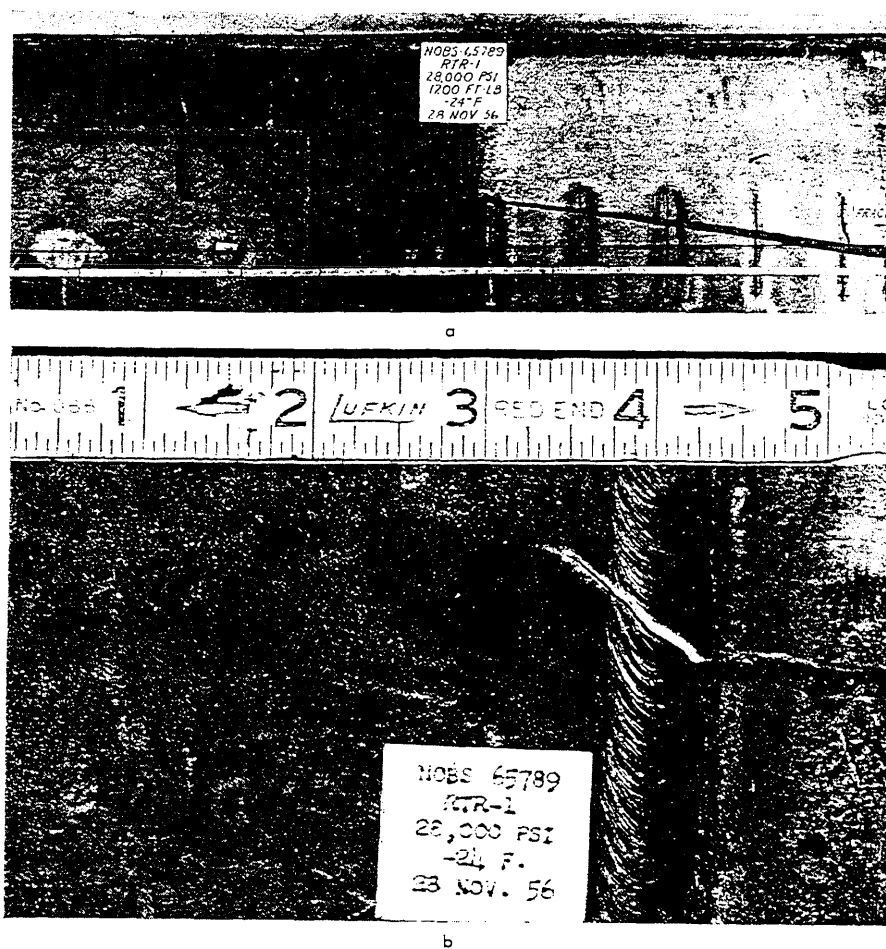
Arrest of 3-ft long crack by 12-in. wide strake of T steel
